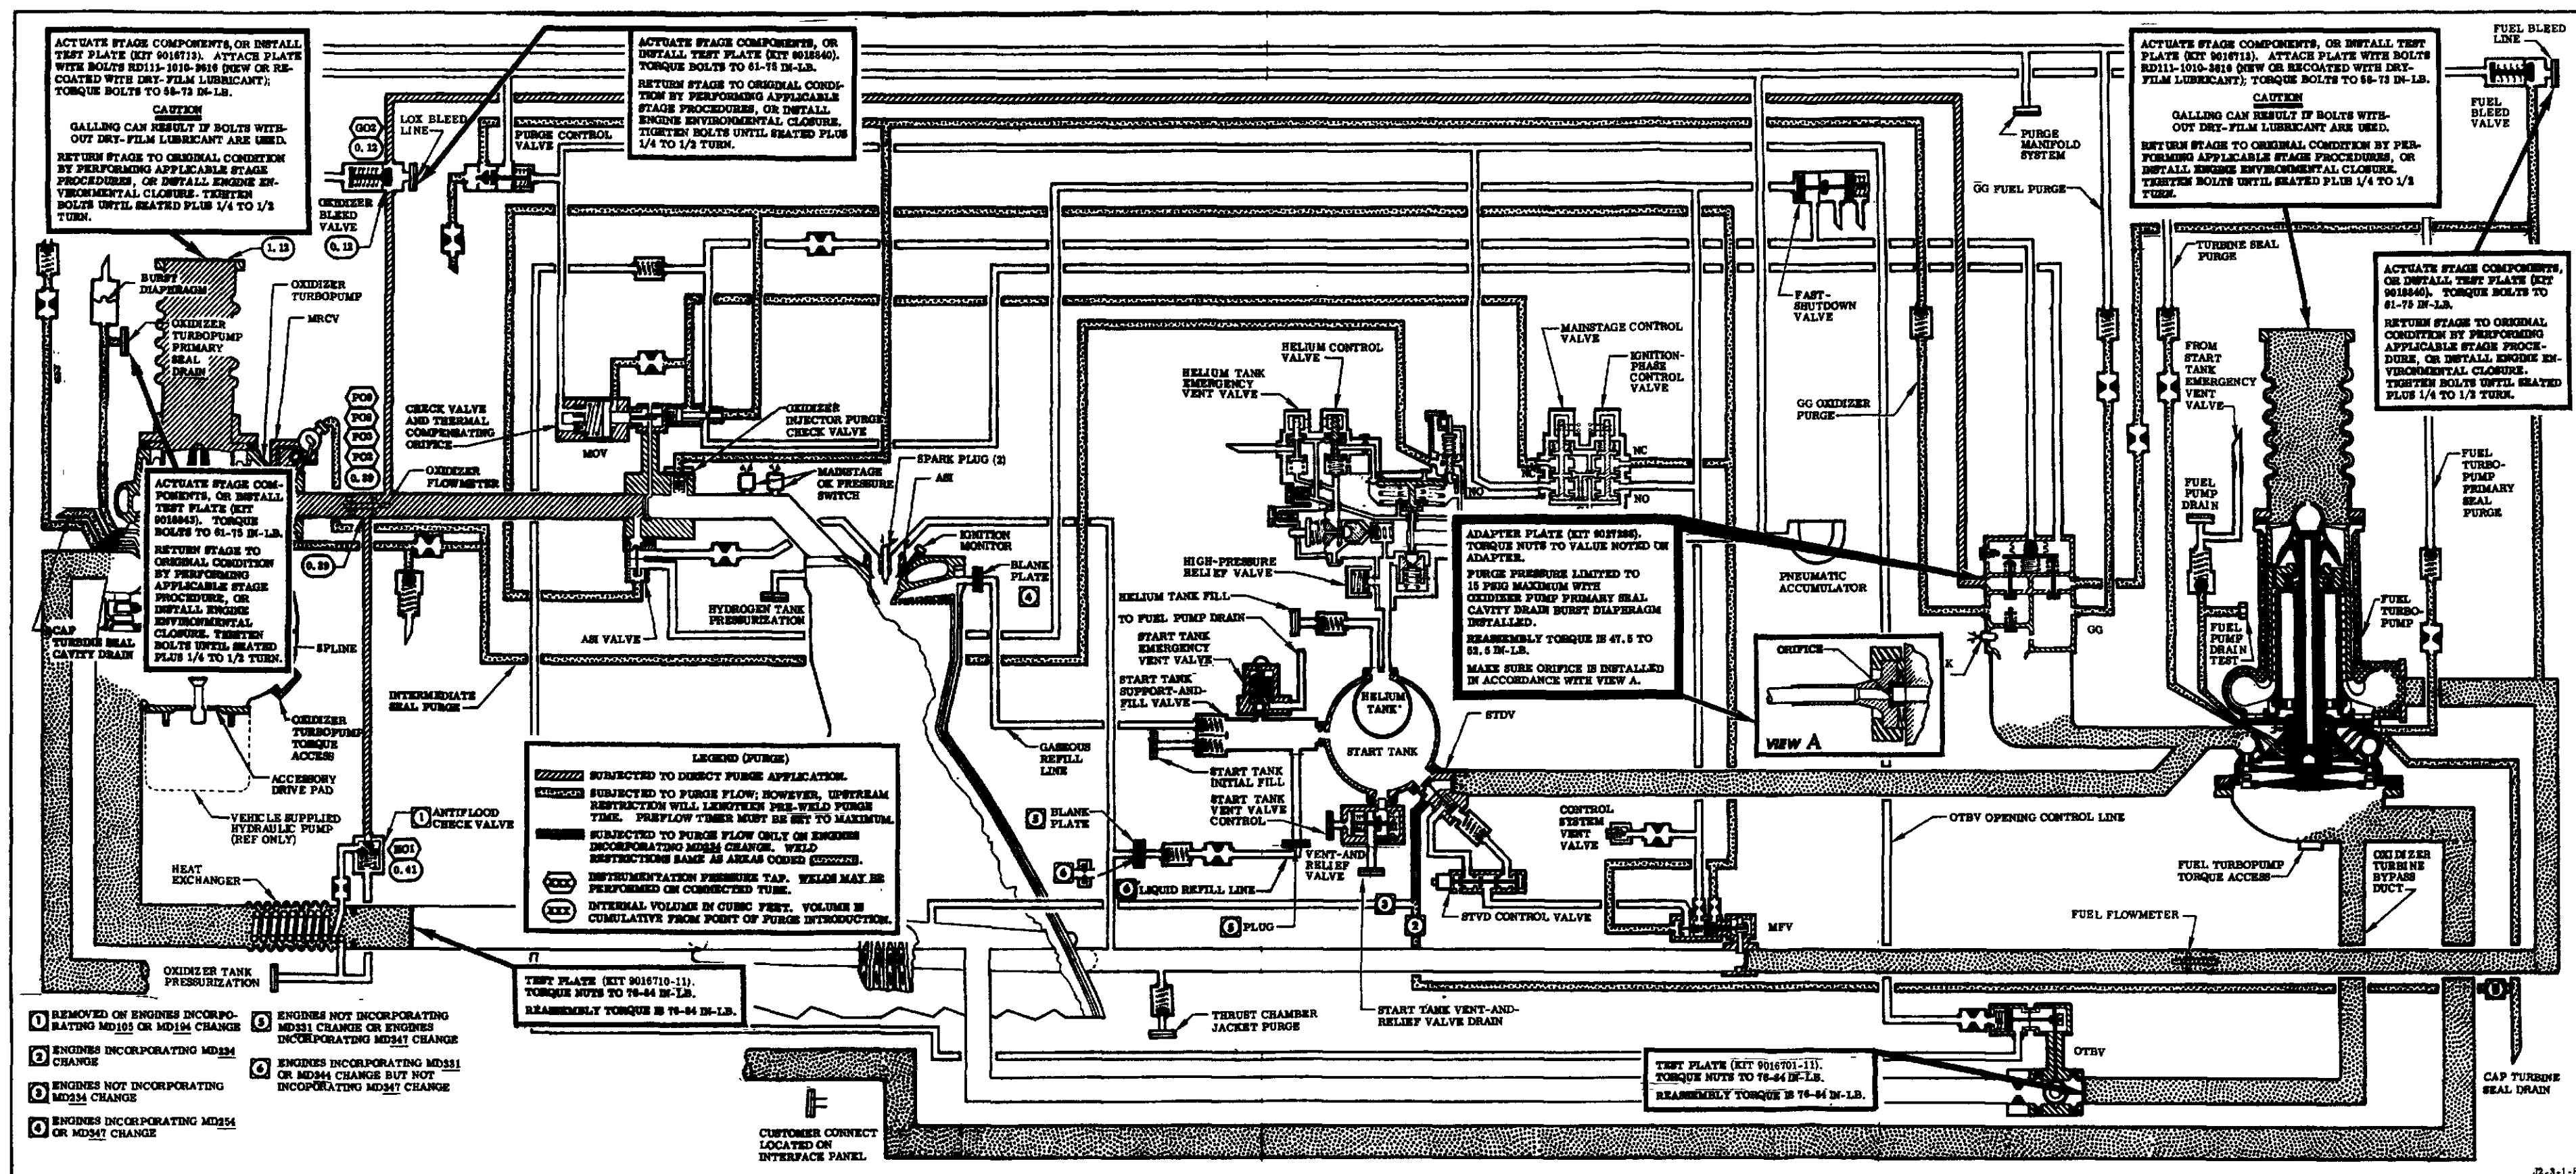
Engine Purge Schematics for In-Place Tube Welding (Sheet 8 of 13)
